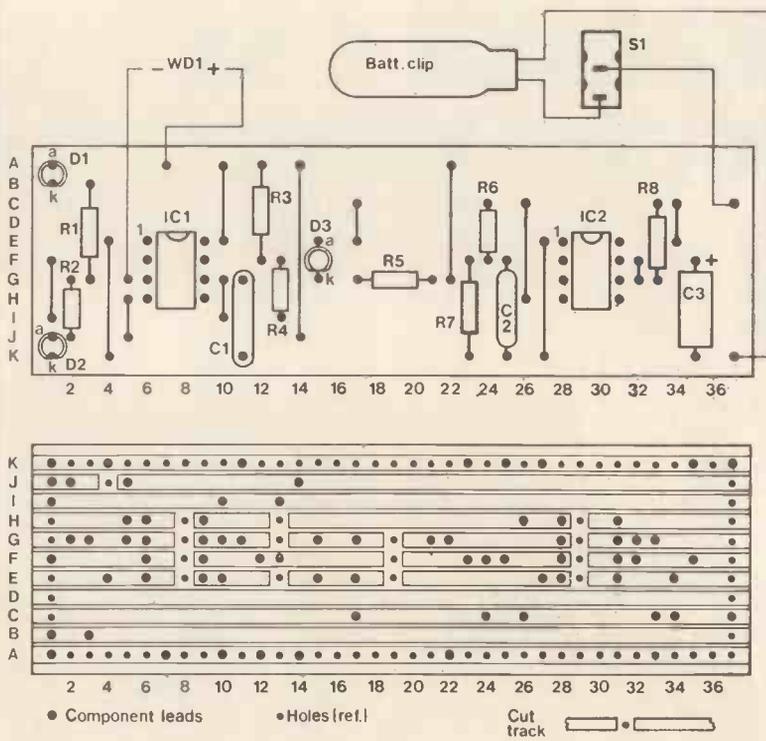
gives details of the component panel and wiring of the unit. The component panel is a Veroboard having 11 copper strips by 37 holes, and this can conveniently be a strip cut from a 95 x 63mm or 95 x 95mm piece of board. There are fifteen breaks in the copper strips to be made before the components and link wires are soldered into place. Be careful to connect the semiconductors and C3 the right way round. Note that although IC1 is a CMOS device, the special handling precautions that are normally associated with CMOS devices are not necessary due to the internal protection circuitry of the ICM7555. Leave the leadout wires of D1 to D3 reasonably long or it may be found that some of the other components on the board will get in the way and make it impossible to fit the board into the case.
